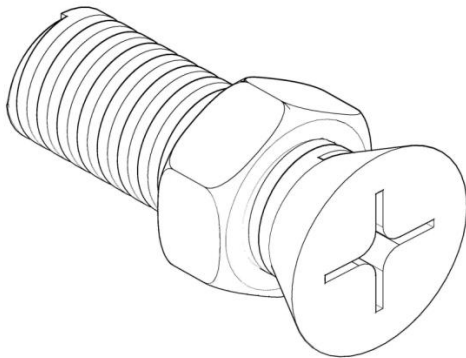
CAD Model of the Countersunk Bolt and Nut
